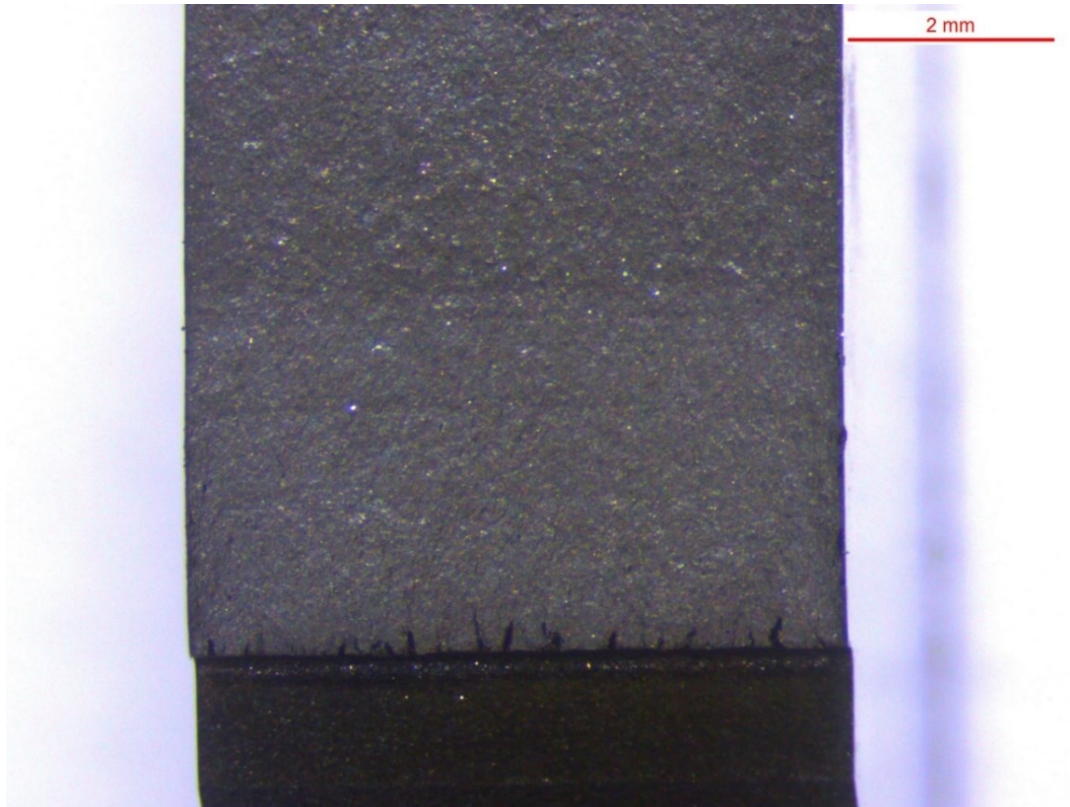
Beachmarks on fracture surface of L3MC specimen.
